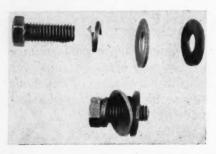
Capscrew with lock washer, plain washer, and rubber washer to be assembled together.
